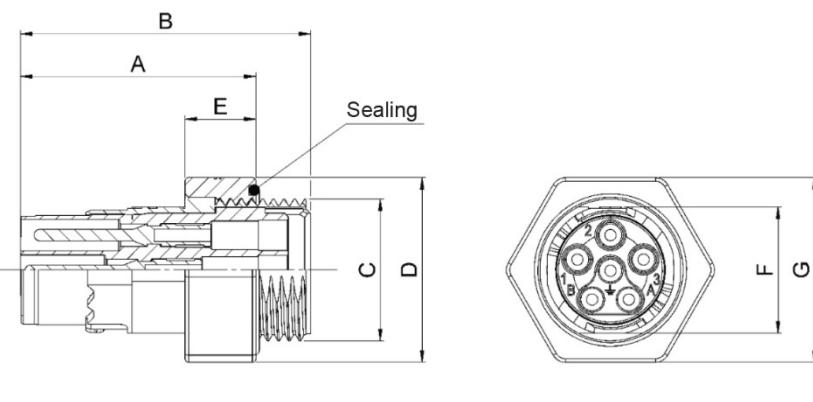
Fixed connector, male contacts, single hole mounting, circular mounting orientation
